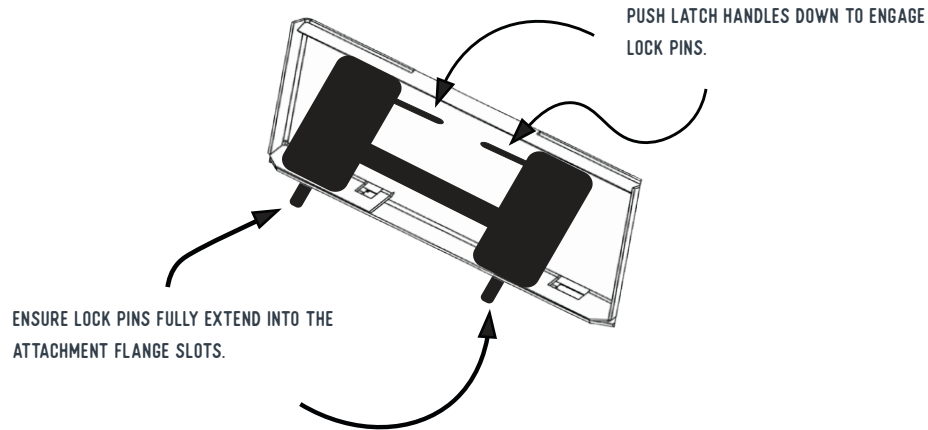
B QUICK ATTACH MECHANISM LOCKED TO ATTACHMENT PLATE
